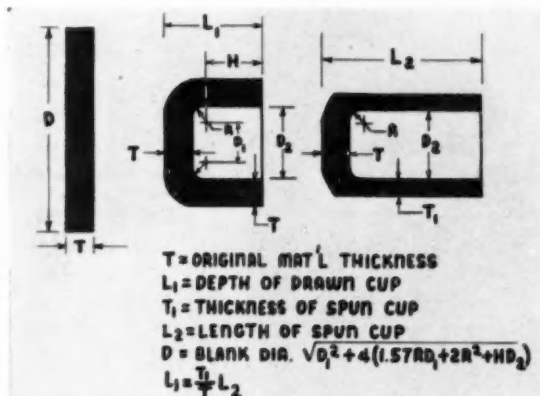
This figure shows how cylindrical parts can be rolled against a mandrel
